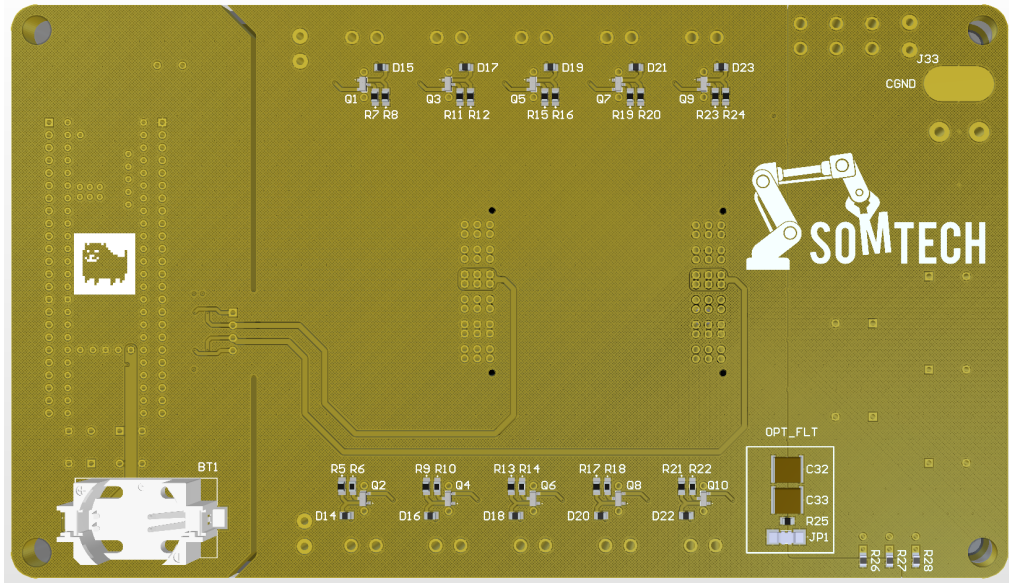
Backplane 2.0 main PCB bottom view (3D)
